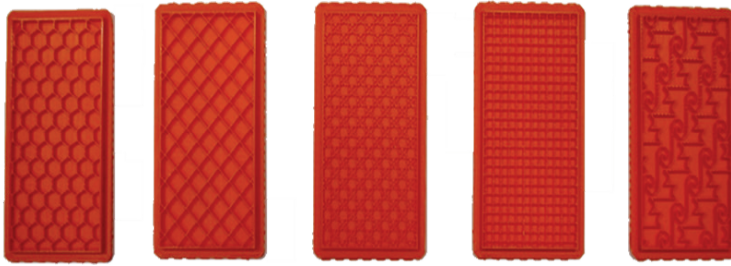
Examples of infill types (10% infill) applied in a MakerBot printer left to right: hexagonal, diamond, Moroccan star, linear, catfill
